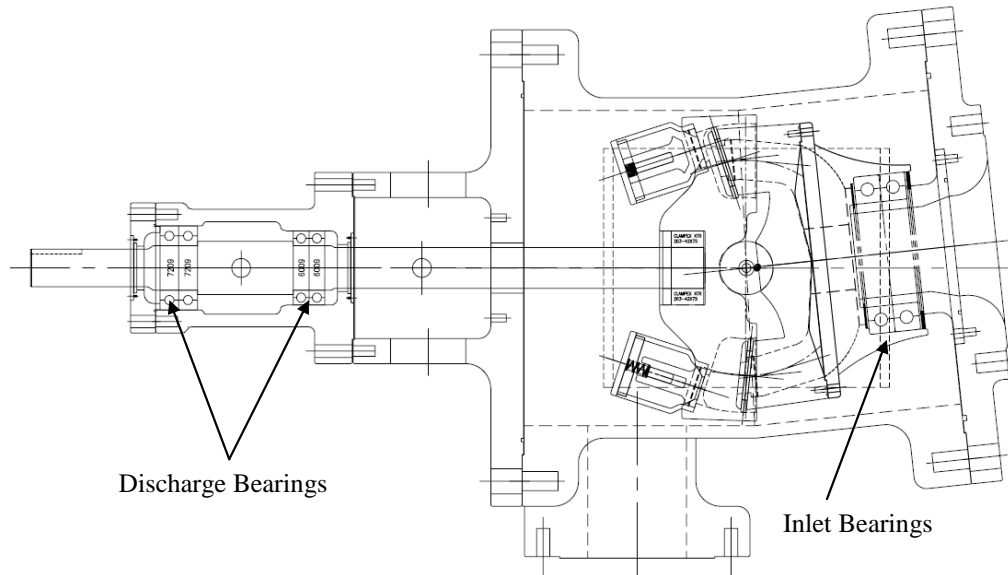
Bearing locations on TurboPiston Pump (Top view)
